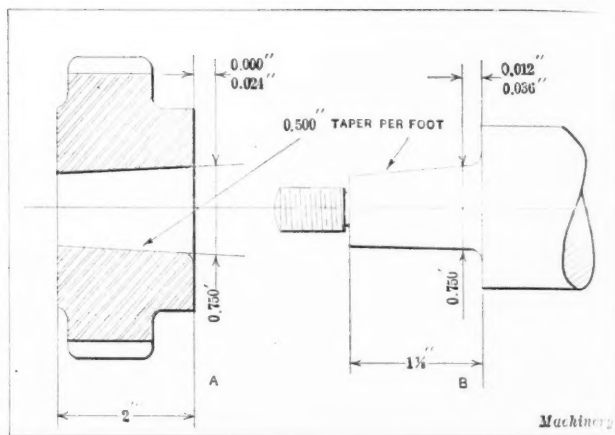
Method of dimensioning Tapered Parts which insures the Correct Taper and Fit
